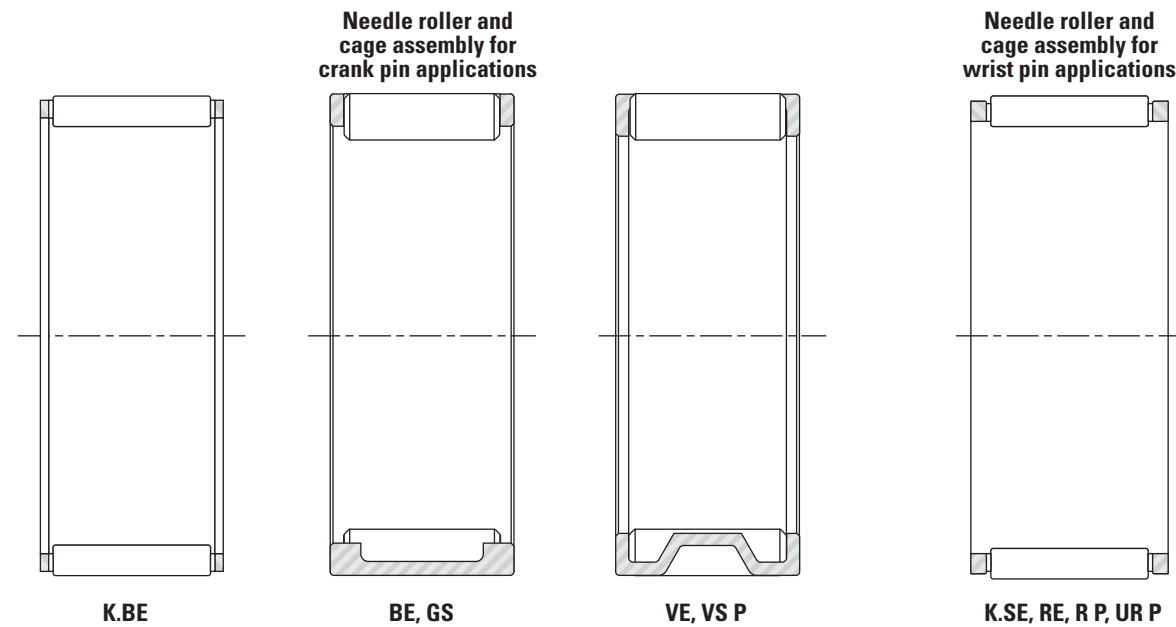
Types of metric series radial needle roller and cage assemblies
